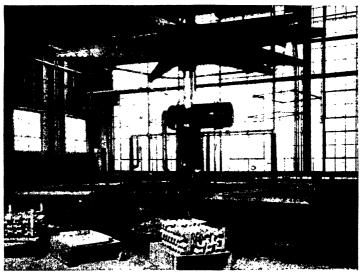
Modern handling equipment is being used more and more extensively in the pickling department. This shows a Mesta machine handling castings through several successive dips.
